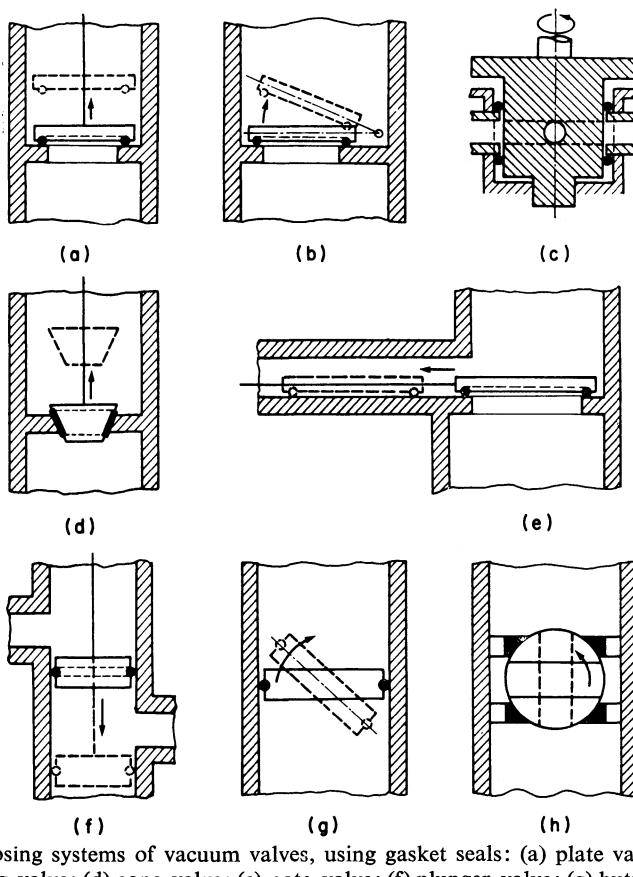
Closing systems of vacuum valves, using gasket seals: (a) plate valve; (b) flap valve; (c) plug valve; (d) cone valve; (e) gate valve; (f) plunger valve; (g) butterfly valve; (h) ball valve
